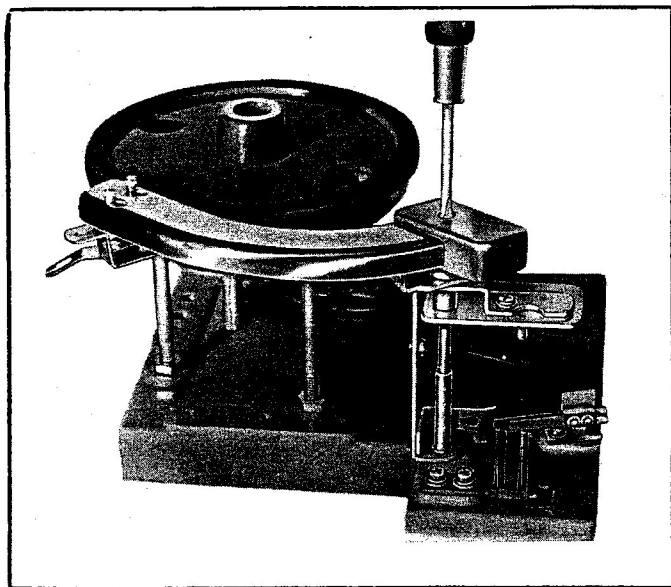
CAM PLATE CLEARANCE ADJUSTMENT
